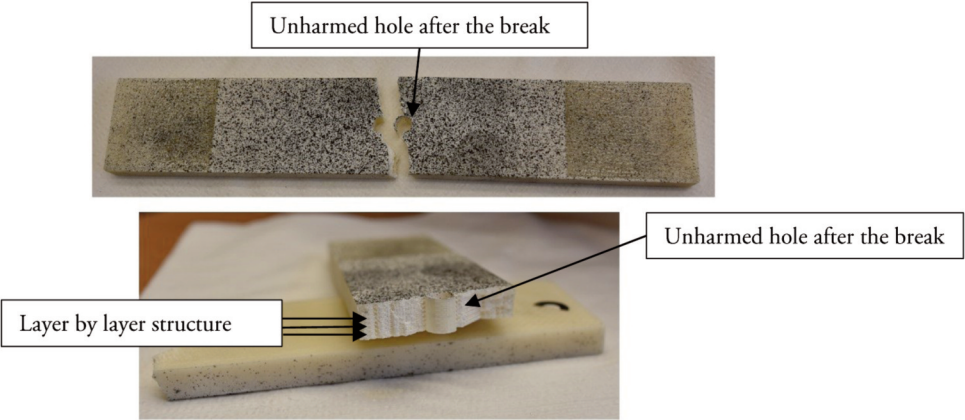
FDM rectangular prism with hole specimen with visible macrostructure and unharmed hole after the break
